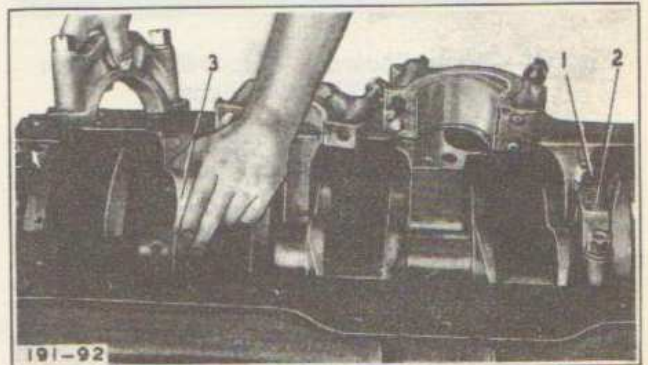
View Showing Removal of Main Bearing Caps and Shells
